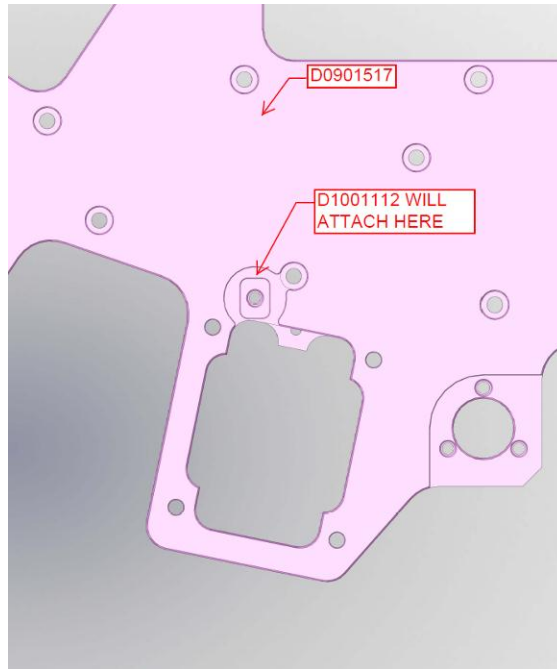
Location for D1001112 Stage 1-2 Tooling Standoff Pin on D0901517 Cut-Out Optical Table
